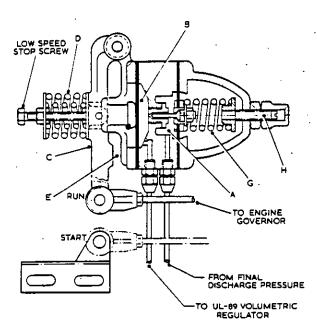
UL-88 Speed and Pressure Regulator with Fixed Starting Position Bracket as used on Diesel Engine Driven Compressor.
